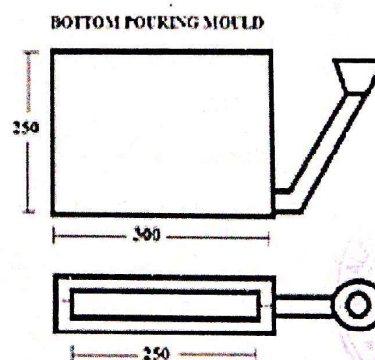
Sizes of molds used for molding. (Units are in mm)
